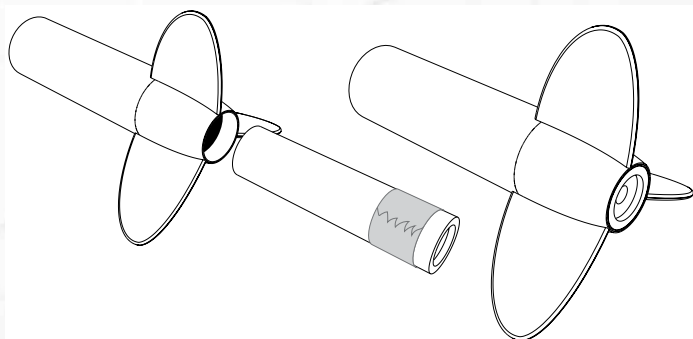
Without an engine mount tube, you can't use friction-fit to hold the motor in.
